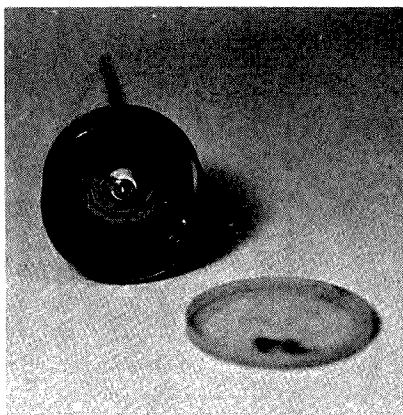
Assembly. Center conductor is soldered to feedthrough lug and coax connector center.
